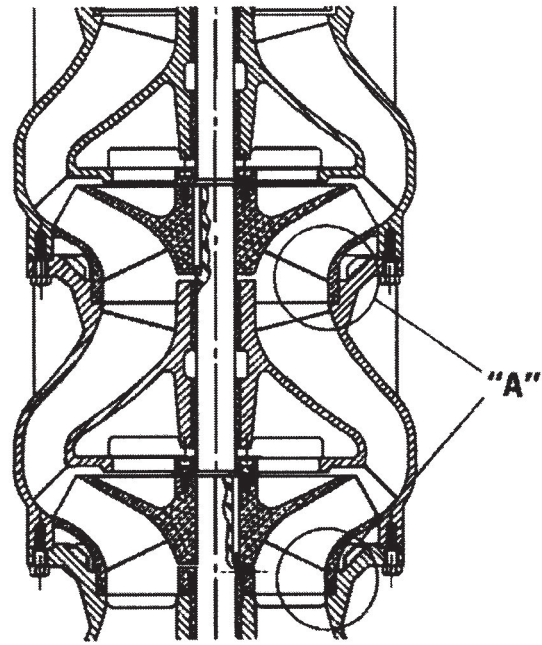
Repairing Enclosed Impeller and Bowl Seal Surfaces
